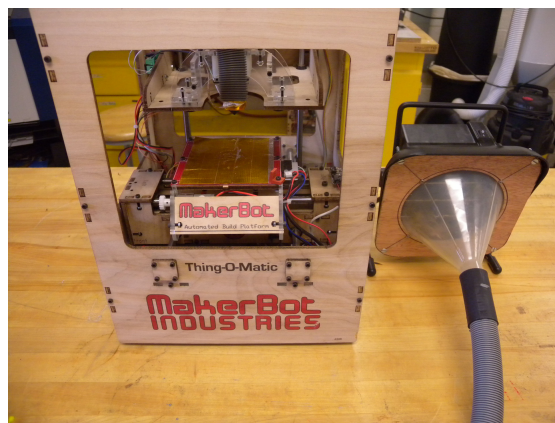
Soldering fume extractors can be used for ventilating the 3D printer when printing materials like ABS.
